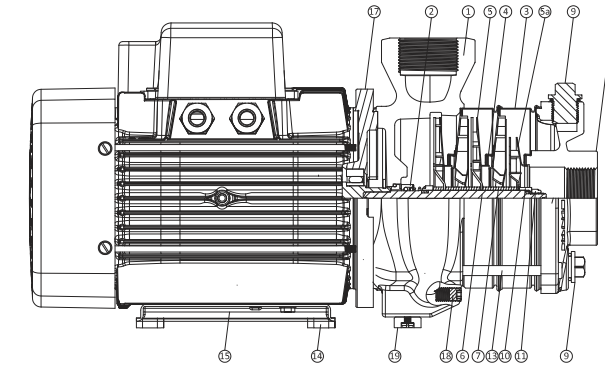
SH, SHI & SHN 8 with SMG 80 motor
